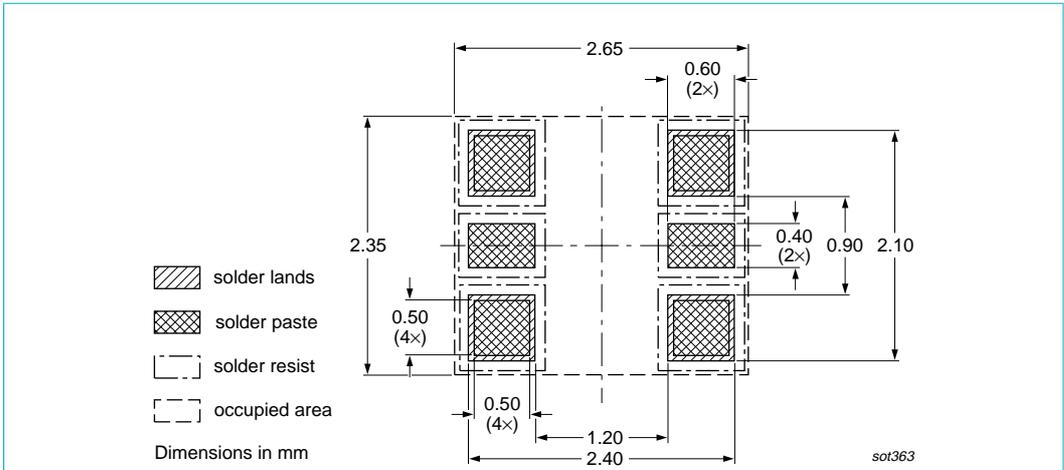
Reflow soldering footprint SOT363 (SC-88)
